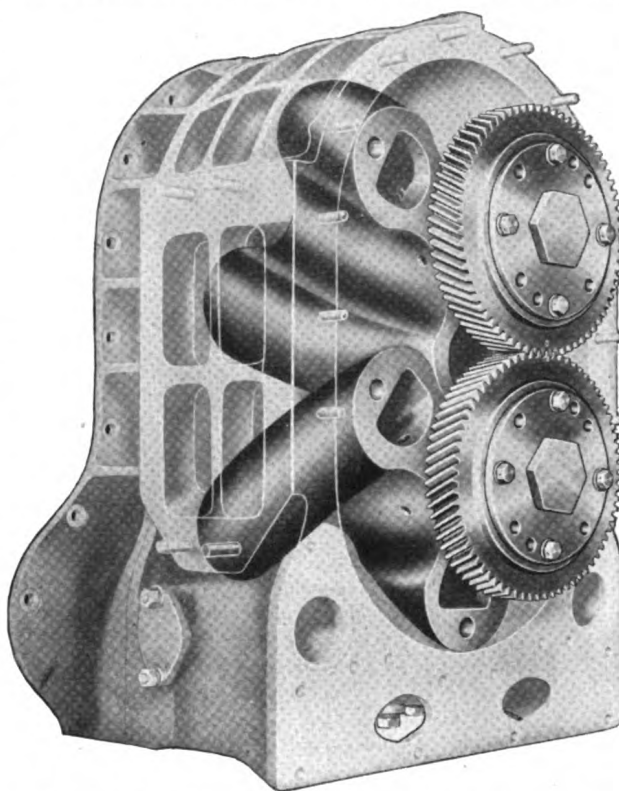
Roots type blower for G.M. 3-268A engine showing helical rotors and timing gears.
